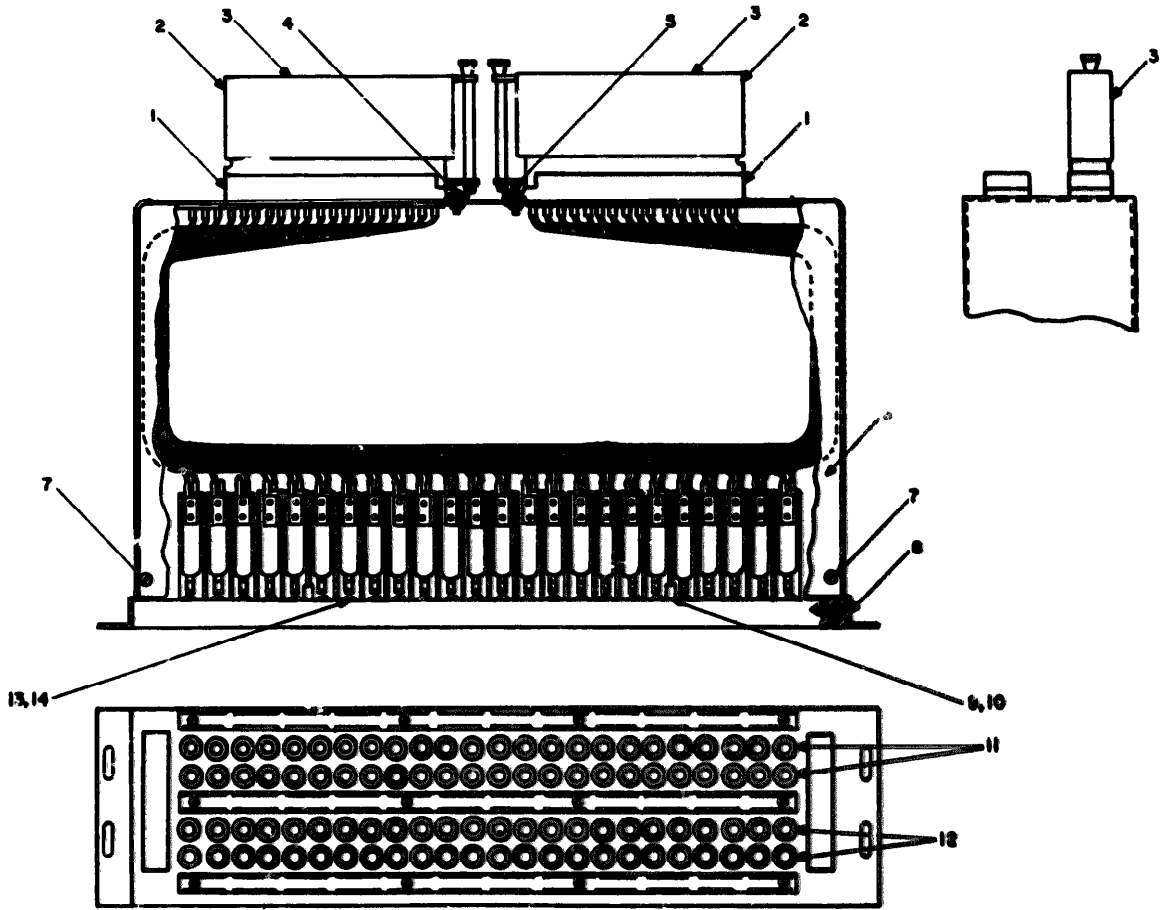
Patch Panel Assembly Wire and Patch Panel Assembly Interbay Port Location
